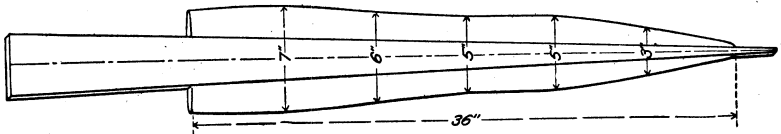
Diagram for stretching board for casing skins. The wedge makes it adjustable in width and facilitates removal from a skin.
